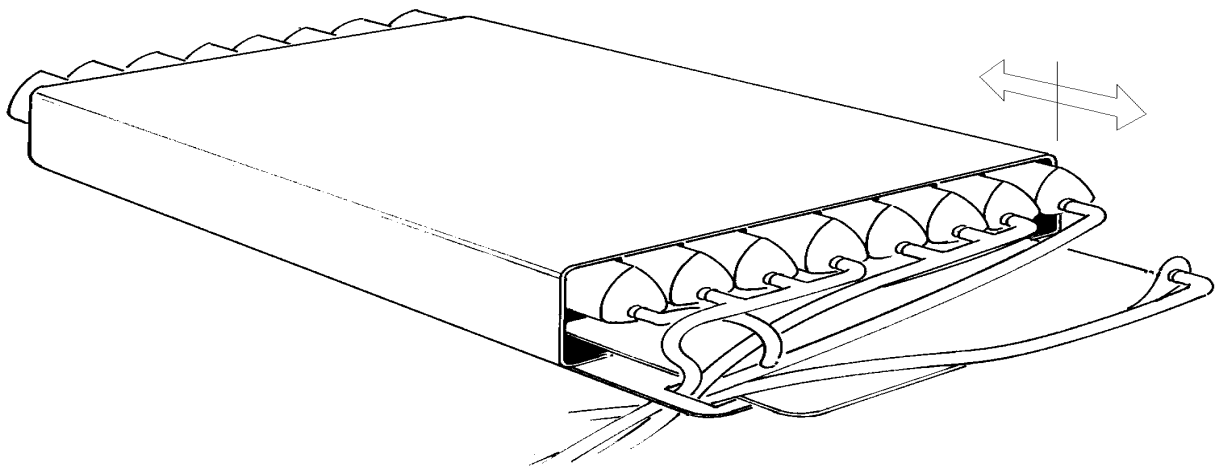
MATTRESS DISASSEMBLY/ASSEMBLY
